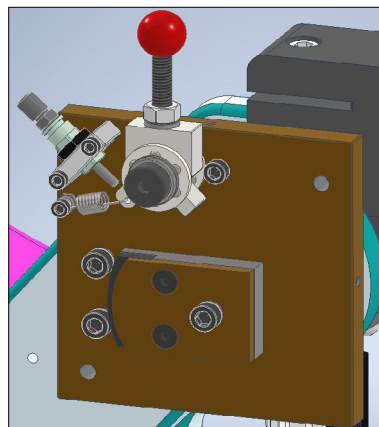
The locking mechanism, the toothed arc and the work cylinder in assembled condition [2]
